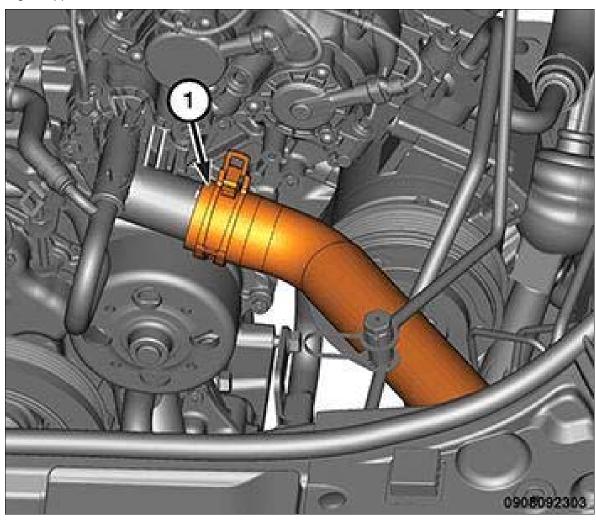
Heater Inlet Hose At Coolant Crossover & Heater Inlet Tube Assembly
